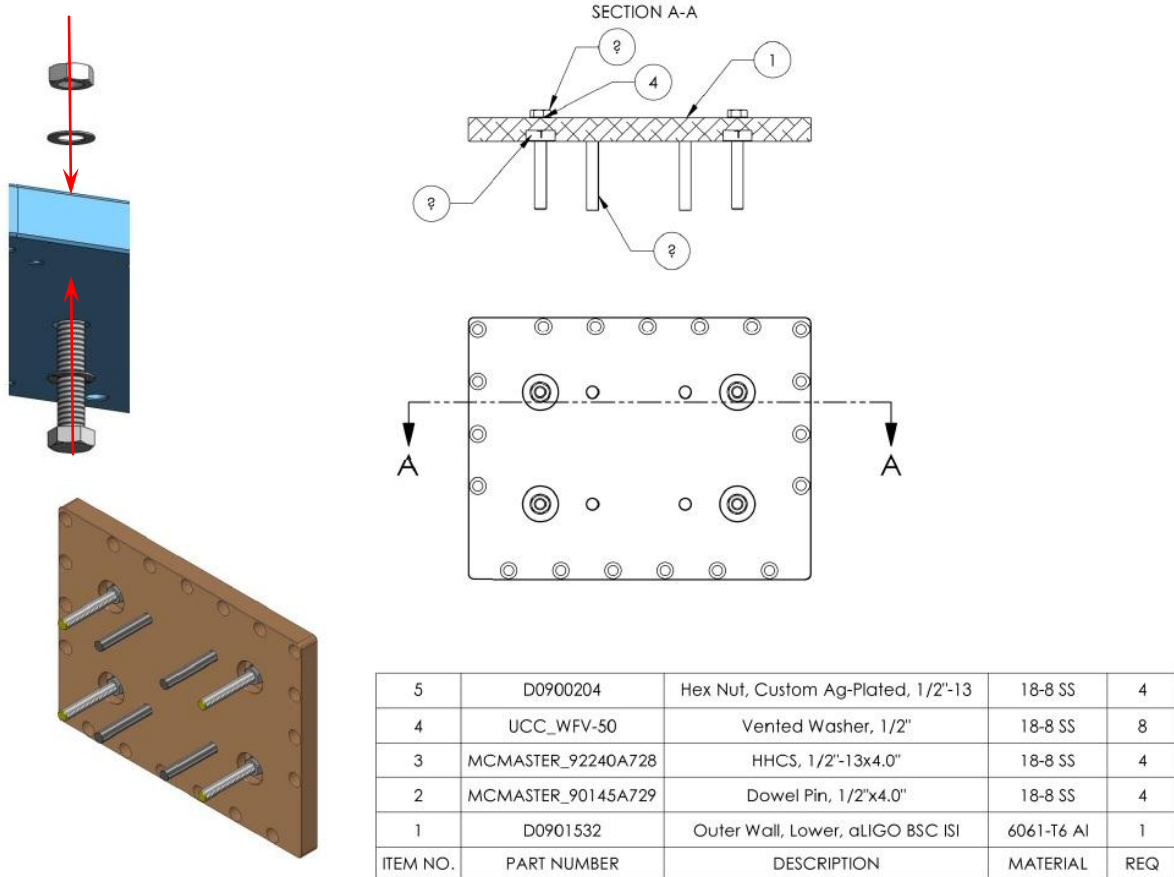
Assembly Drawing of D1000052 Lower Outer Wall Assembly
